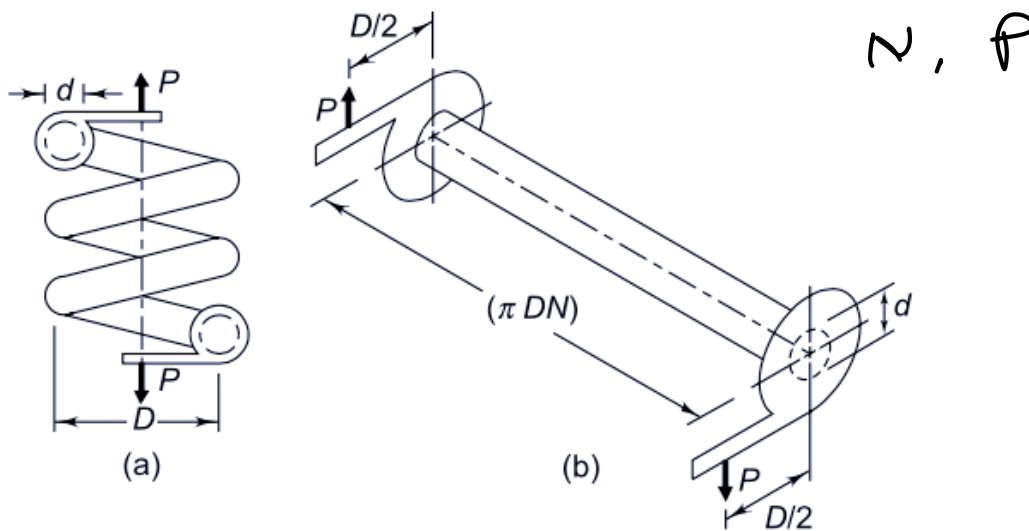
(a) Helical Spring (b) Helical Spring-unbent
